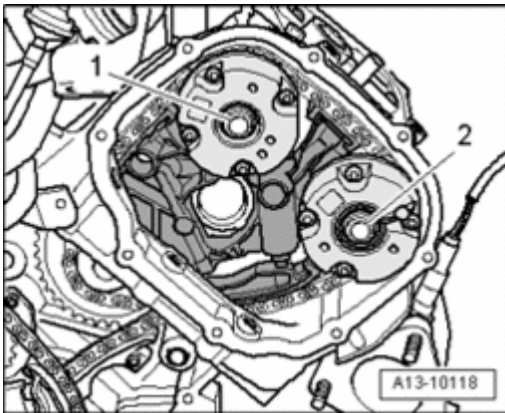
Removing Bolts For Camshaft Adjuster Using Multipoint Socket T10035
